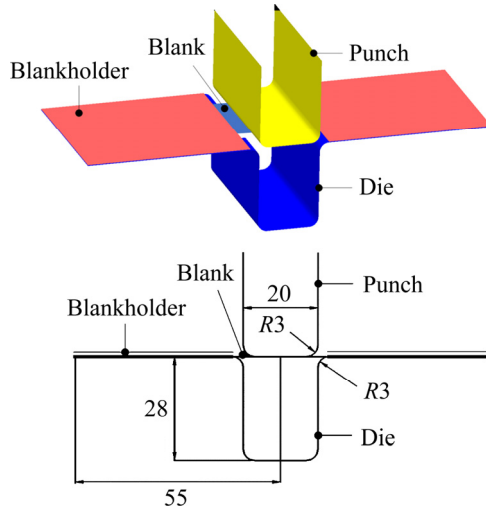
Geometric dimensions of U-bending setup (Unit: mm)
